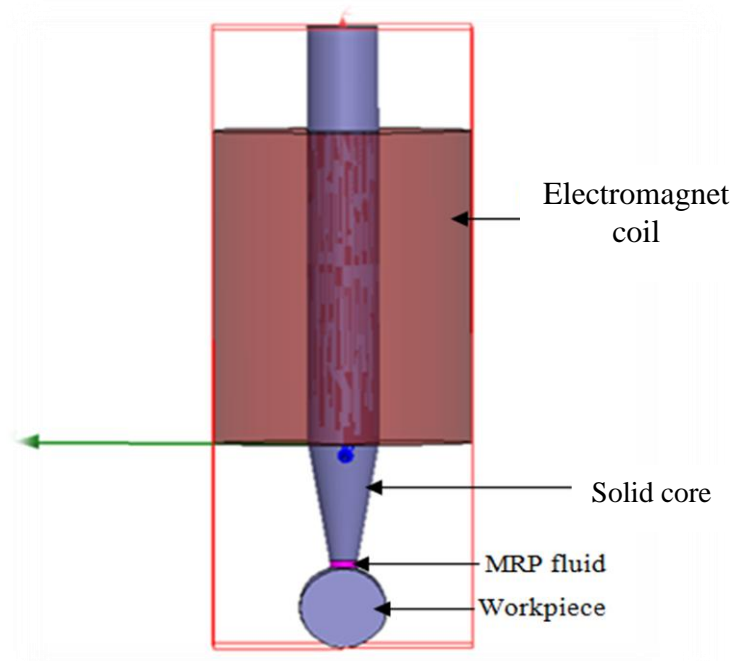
Electromagnet model of turning type MRF flat tool tip with external cylindrical surface
